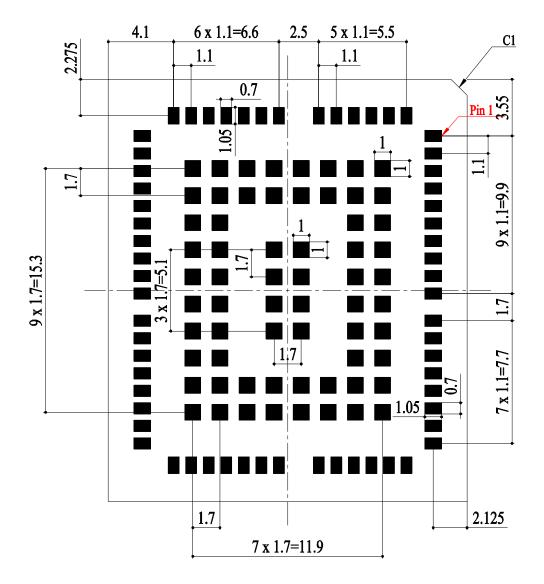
EG916Q-GL Bottom Dimension (Bottom View, Unit: mm)
